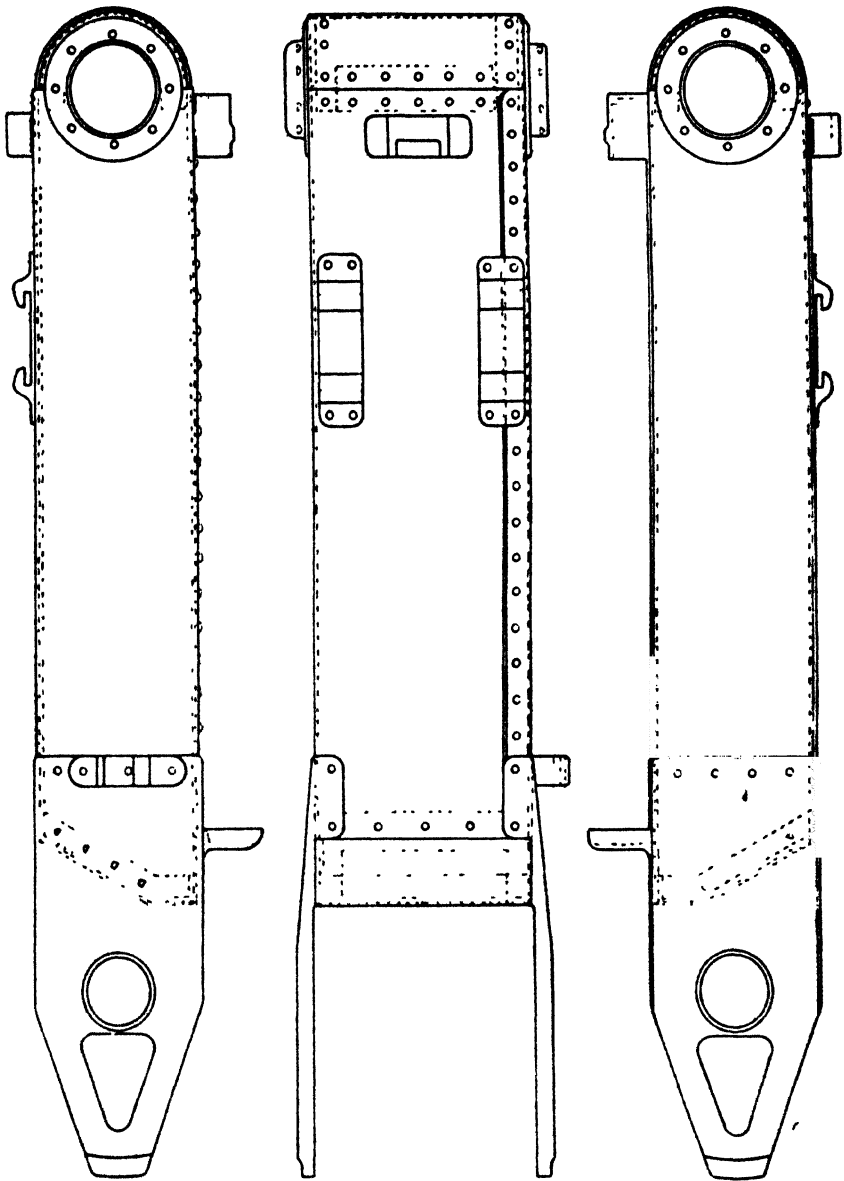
Line drawings showing the riveted construction employed on the outriggers which form part of the chassis as manufactured according to the English or Swedish design.
